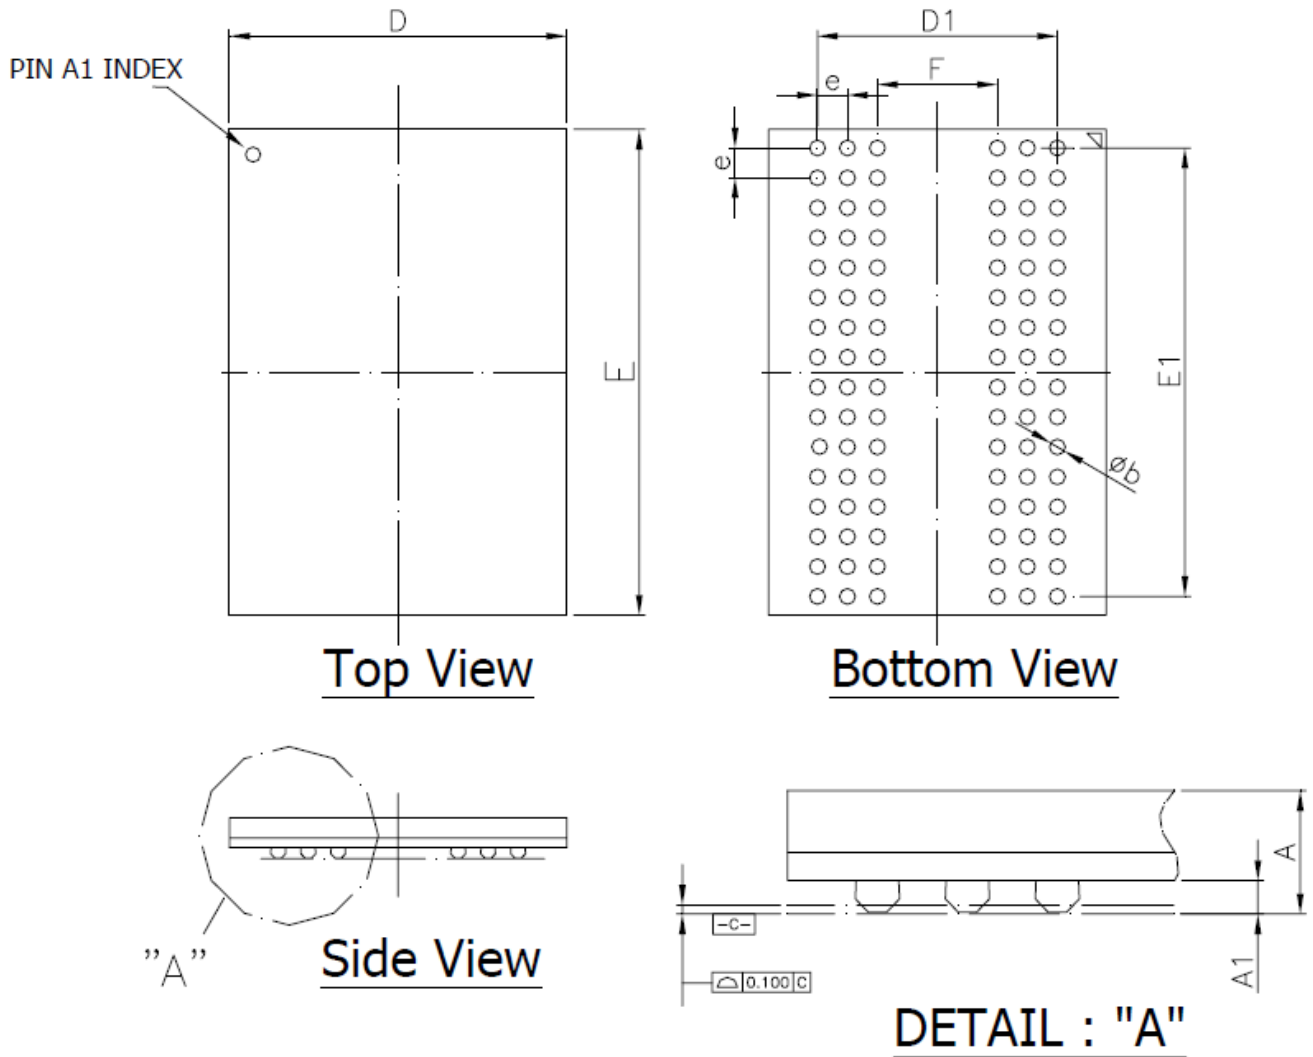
Package Outline Drawing Information for 96-Ball FBGA (x16)
